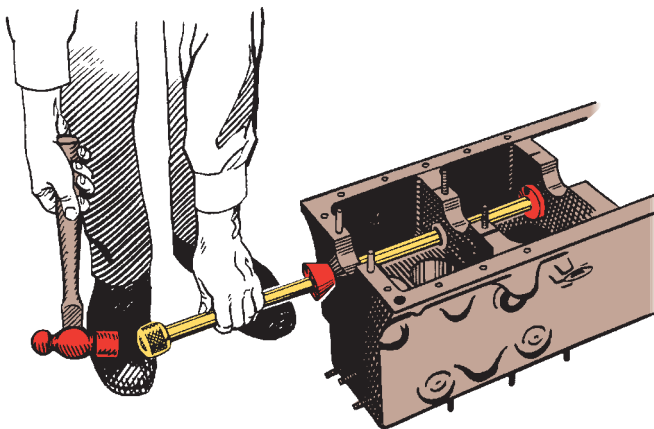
Cam bearings are normally press-fit into the block or head using a bushing driver and hammer.
